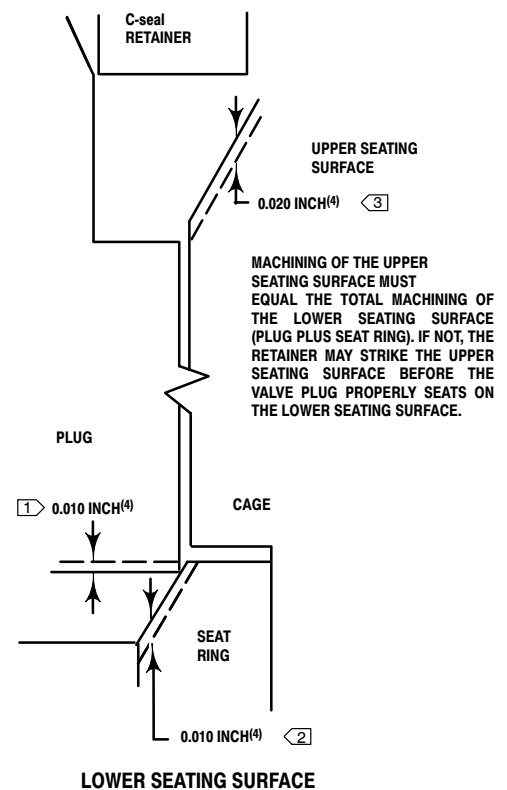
Lower (Valve Plug to Seat Ring) and Upper (C-seal Plug Seal to Cage) Seating Surfaces
